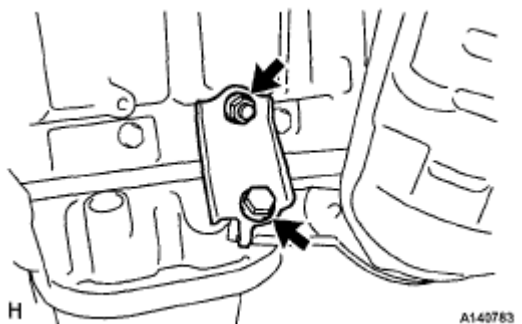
Locating No. 2 Manifold Stay Bolt And Nut
